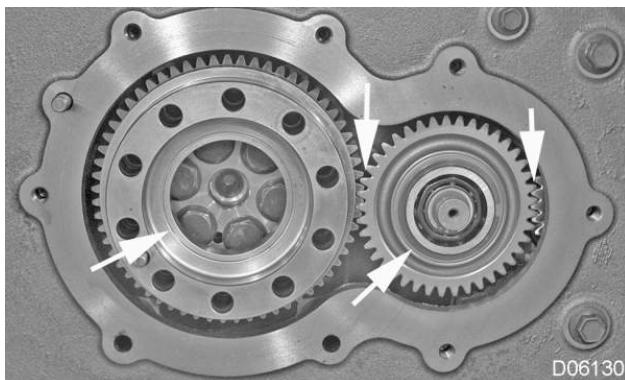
Verify Witness Marks Facing Out and All Gears Are Aligned
